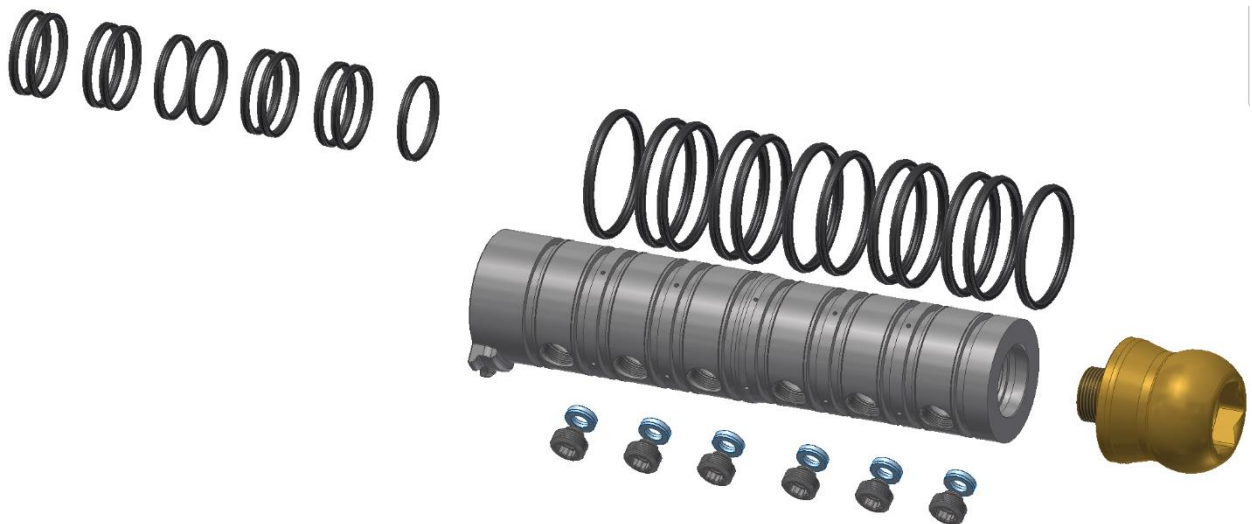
Valve Stab™ Seal Carrier with internal and external seals
